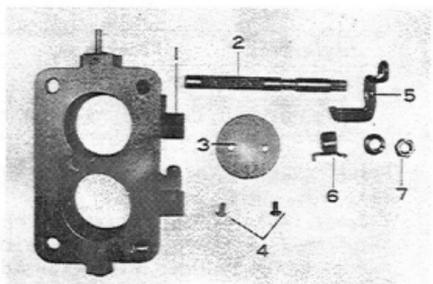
Assembling Secondary Throttle Valve 01911
